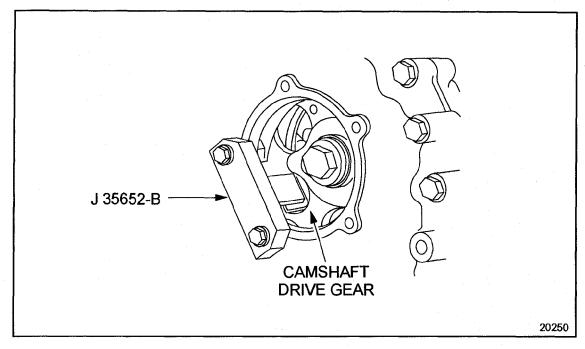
Installation of Camshaft Drive Gear Torque Holding Tool
